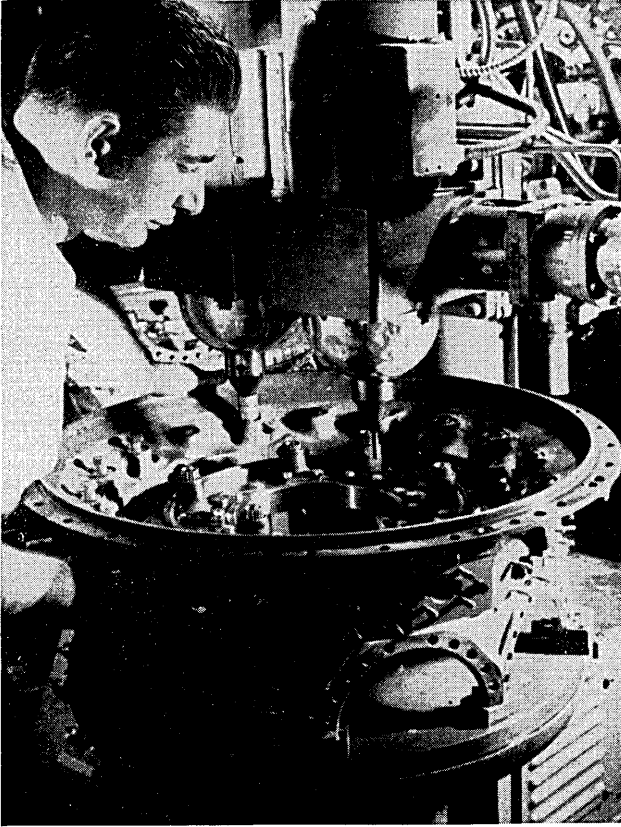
Automatic bolt-positioning and torquing machine for aircraft engine housings (Courtesy Wright Aeronautical Division, Curtiss-Wright Corp.)
